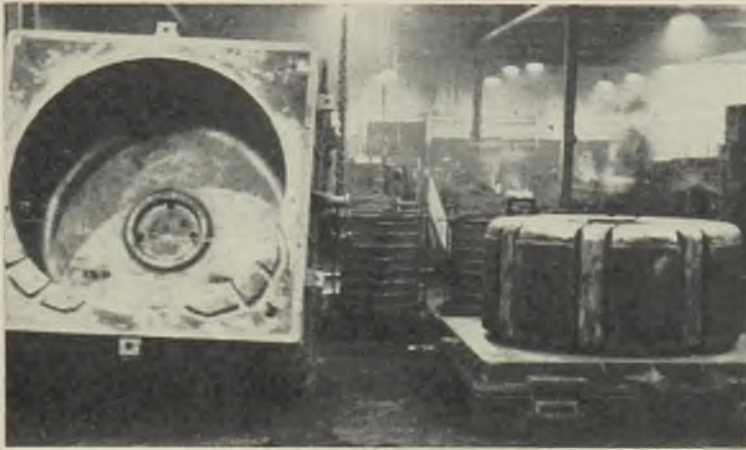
TOP AND BOTTOM MOULDS FOR DEEP END-COVER.
